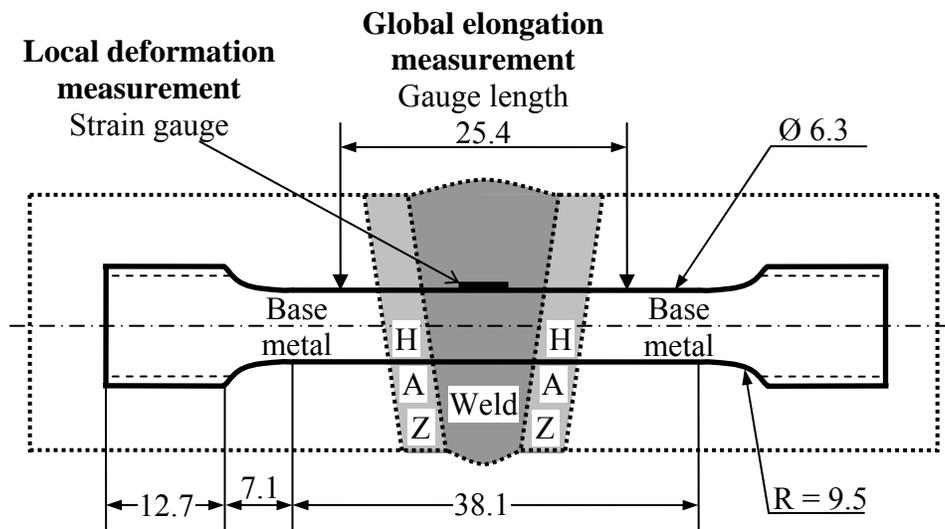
Round tensile specimen across the girth weld section (dimensions in mm).
